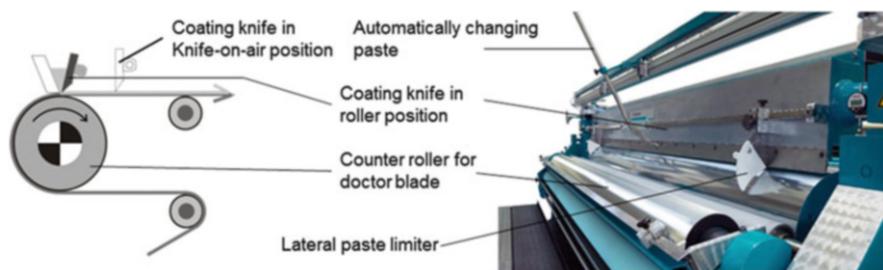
Coating module in combination with coating machine (Source: Coatema Coating Machinery GmbH)
